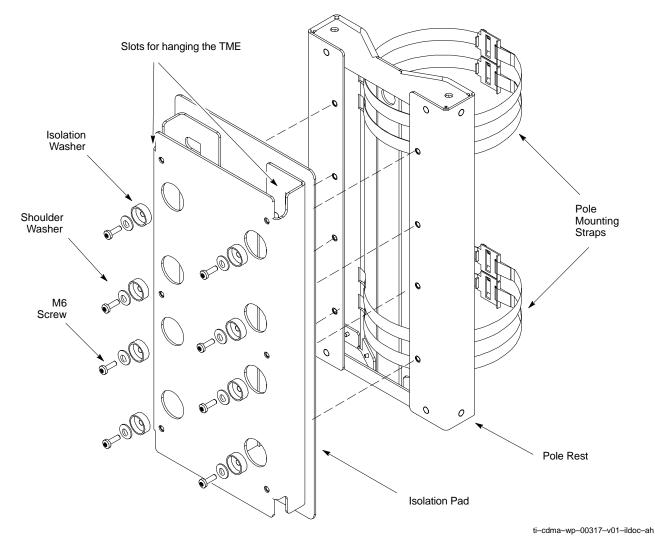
Wall Mounting Bracket and Pole Mounting Bracket Assembly
